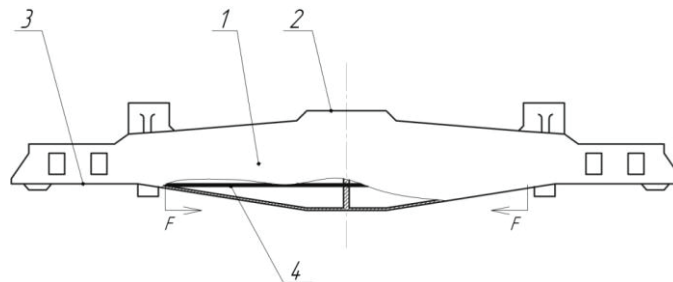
Pre-stressed bolster of a three-piece bogie: 1 - truck bolster; 2 - bolster bowl; 3 - support bearing; 4 - rod
